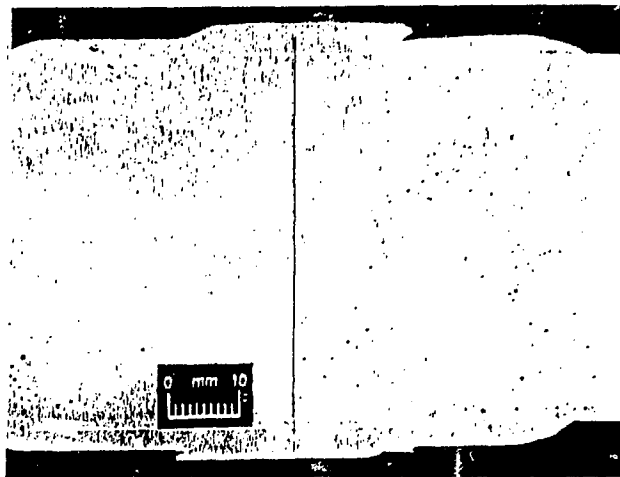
Jo-Block specimen showing "crack" between parent blocks and clad overlay.
